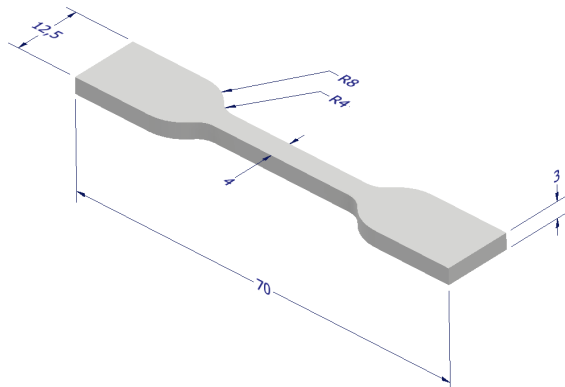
Dog-bone specimens for tensile testing (ISO 527:2019 - type A); dimensions in mm
